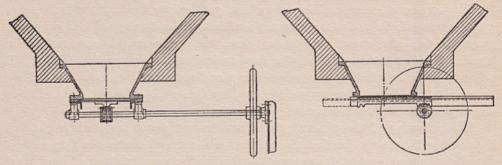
Hopper Mouthpiece Rack and Pinion Slide.
